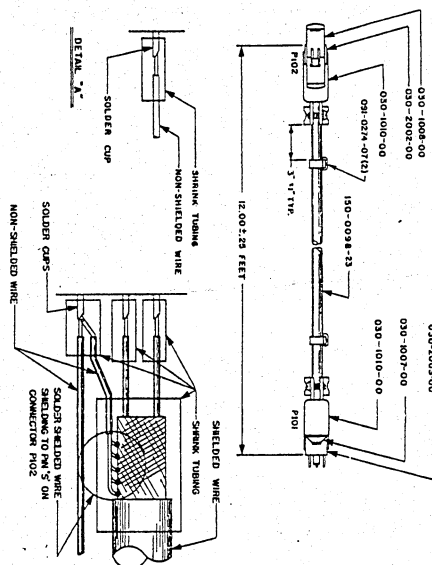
KI 256 ADAPTER CABLE ASSEMBLY
